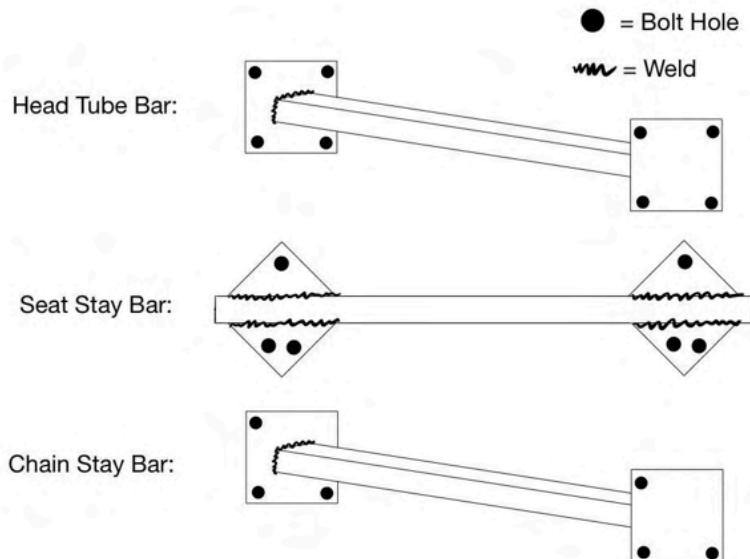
Diagram of Welded Steel Tube Attachments
